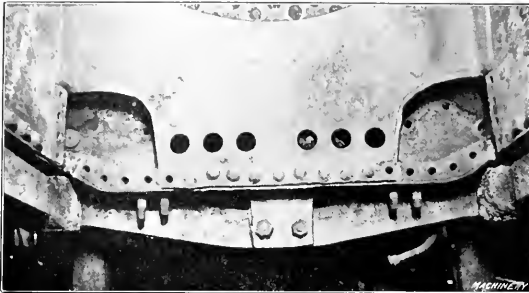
Fractured Mud-ring of Locomotive Firebox prepared for making the Welds
